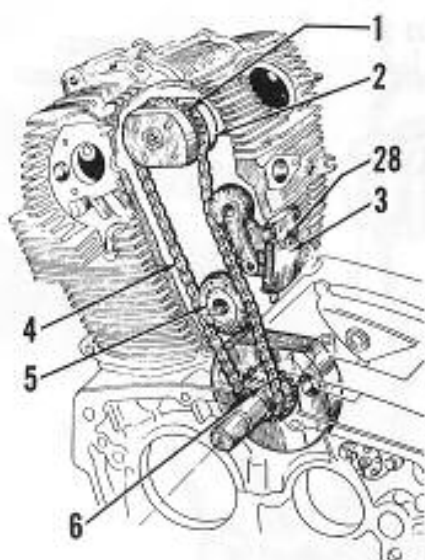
Cut-away view showing timing chain arrangement.
